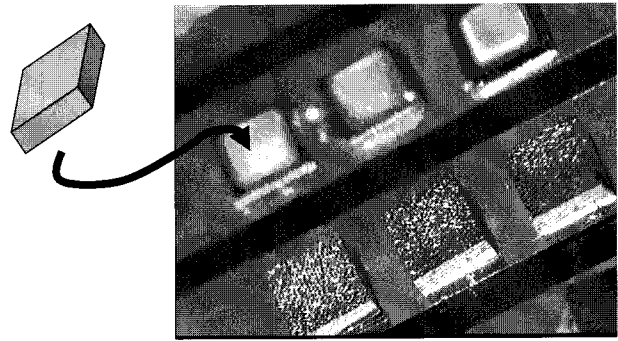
Fluidic self-assembly: small parts with hydrophobic surface treatment are assembled on hydrophobic patches. The parts were permanently bonded after assembly step by curing the organic lubricant. [6]
